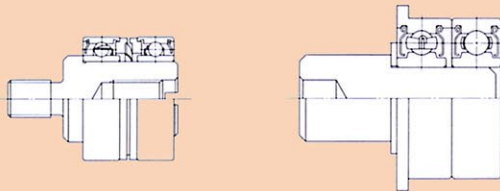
Inner Rings Bonded on Shaft (Short Span)
